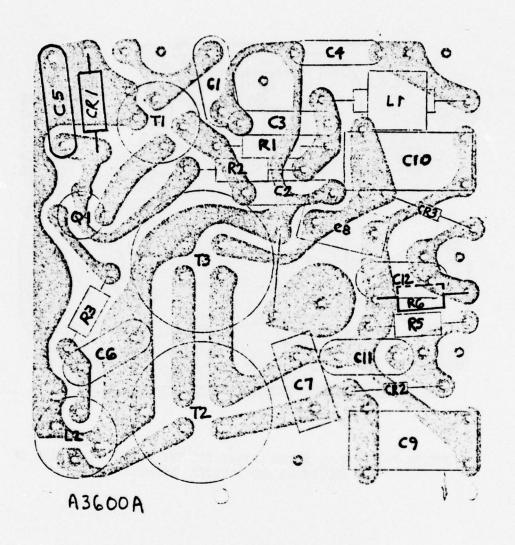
P.C. BOARD LAYOUT FOR THE A3600A CRS HUNT DISCRIMINATOR ASSEMBLY
